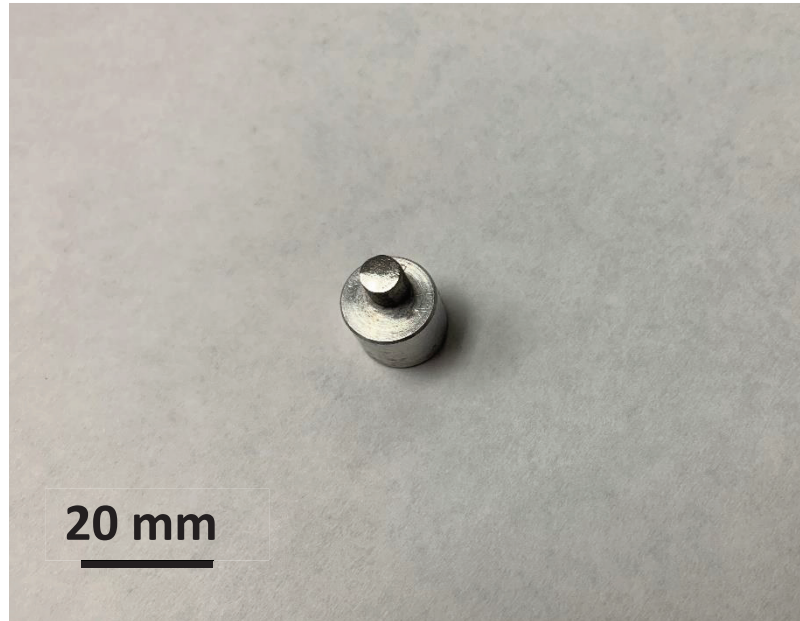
3D printed Ni-Mn-Ga parts [30]
